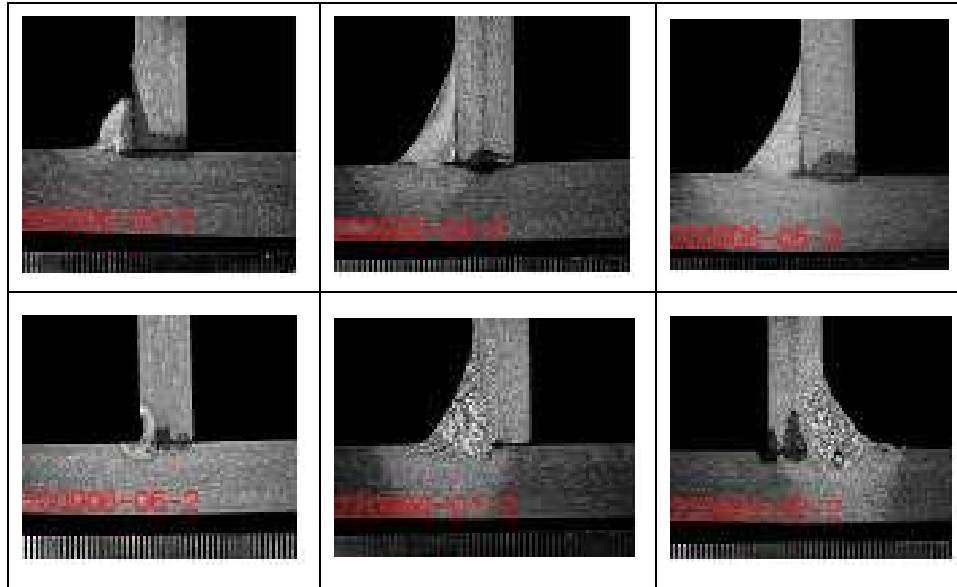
9 Cross section of MIG/ Laser/ Hybrid (Laser+Arc, Arc+Laser) fillet joints; No.220906-03 MIG in 1000mm/min welding speed, No. 220906-04 MIG in 700mm/min welding speed, No. 220906-05 MIG in 600mm/min welding speed, No. 200906-06 Laser welding, No. 220906-01 Laser-arc hybrid welding, No. 220906-02 Arc-laser hybrid welding.
